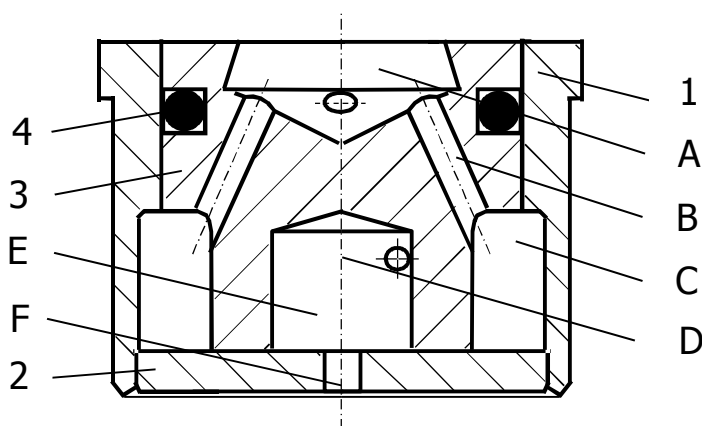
General view and principal design arrangement of the ROSÁ atomizer.
